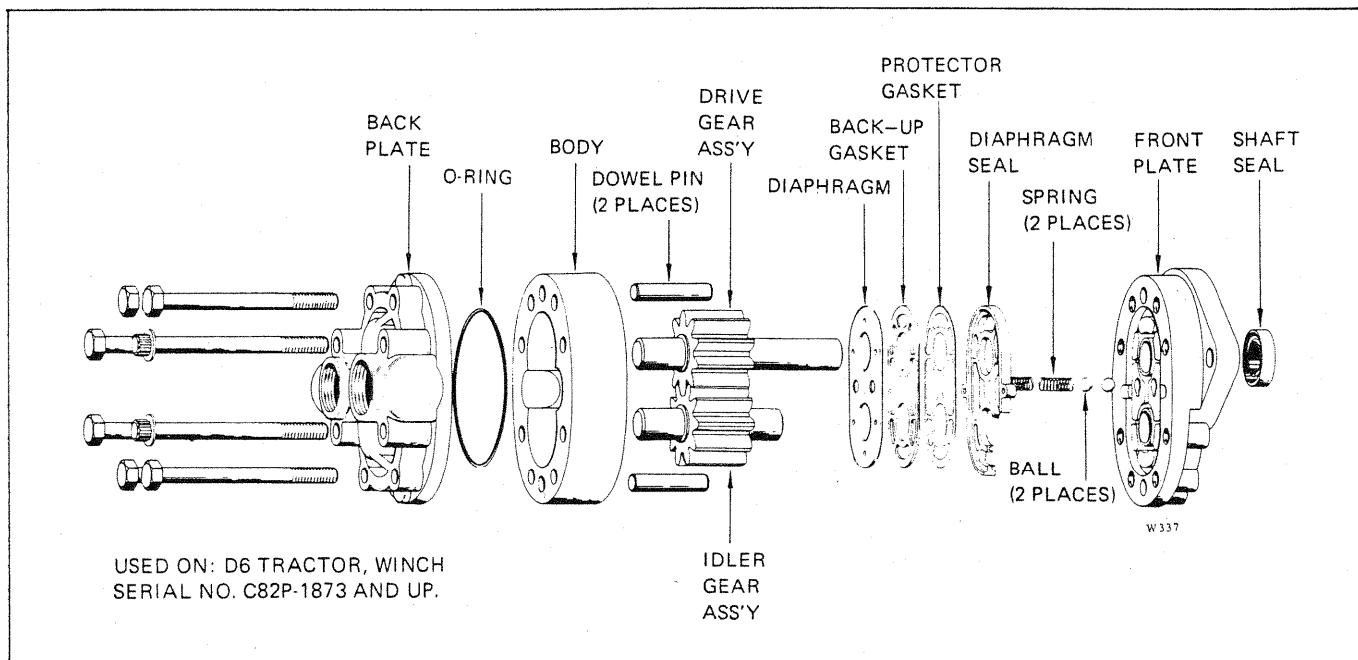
HYDRAULIC PUMP ASSEMBLY (Sheet 2 of 2)
